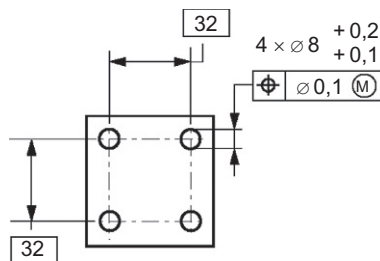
Example of drawing indication, position tolerancing without datum
